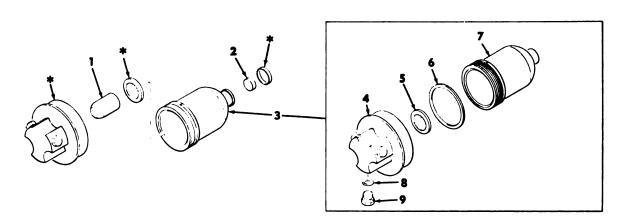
CASE AND ADAPTER ASSEMBLY /10228126/ /SEE FIGURE 17 FOR NEXT HIGHER ASSEMBLY/
